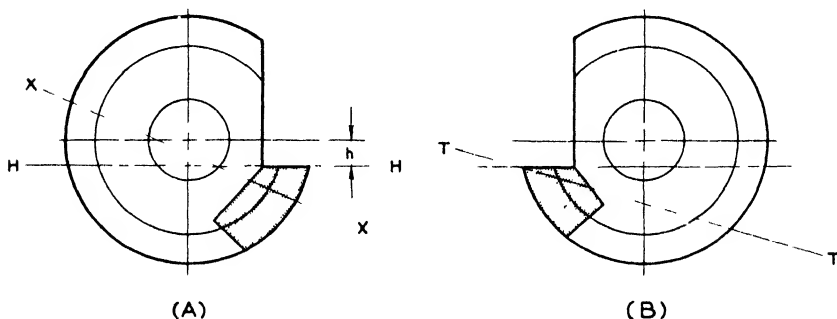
How the Cutting Distance May Be Changed by Grinding Circular Forming Tools Incorrectly
